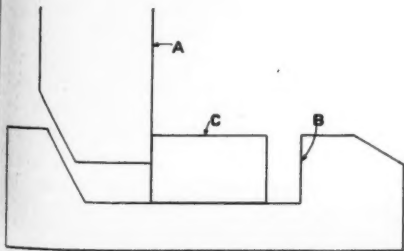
Drawing showing principle upon which riveting mechanism operates.
